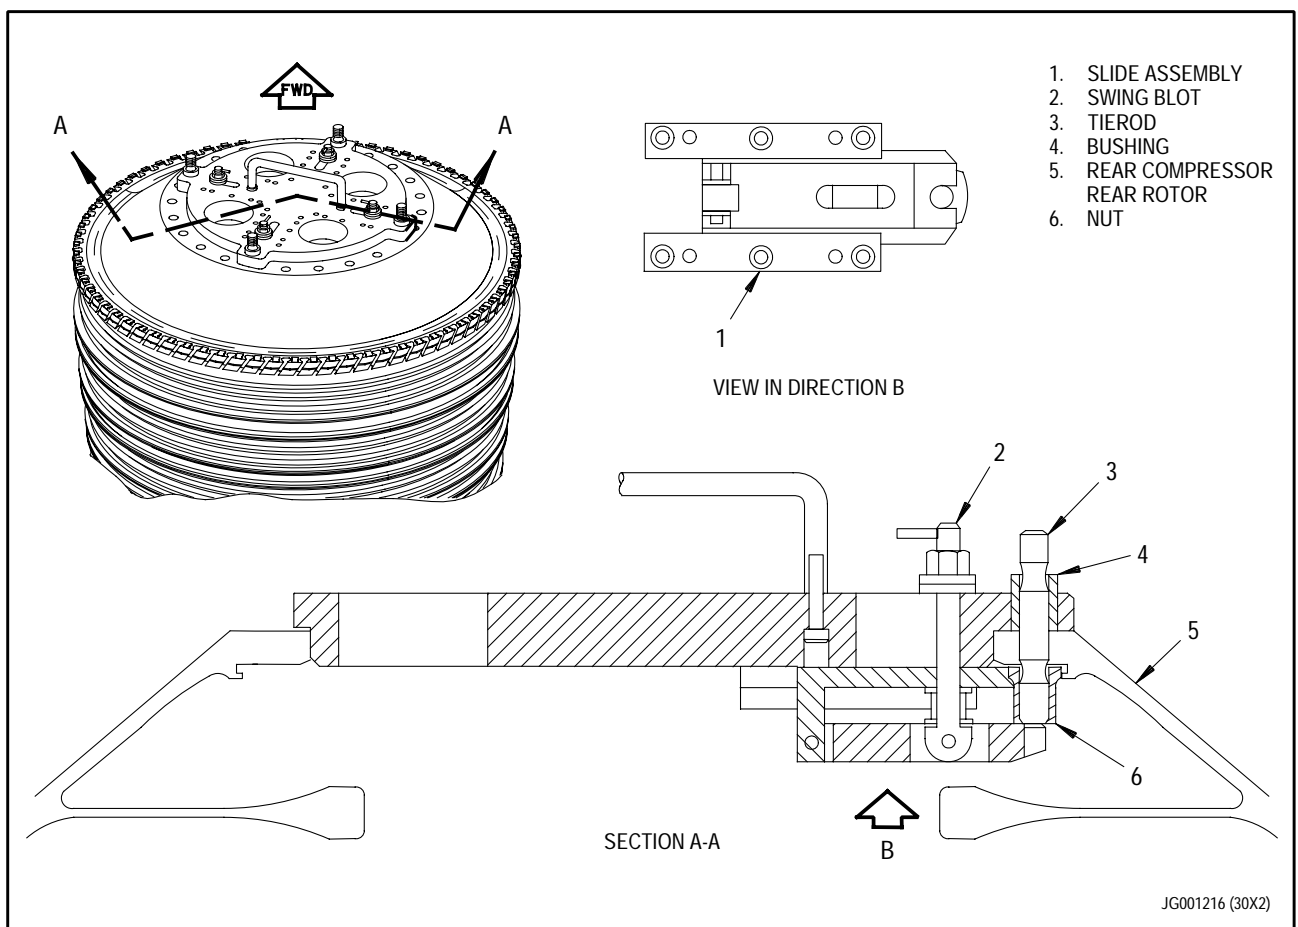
Installation of Tierods Using PWA 57537 Torque Fixture
